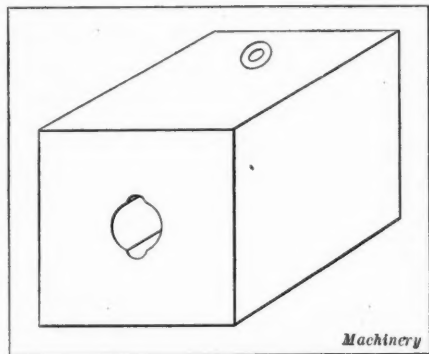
Simple Jig for drilling Cotter-pin Hole
